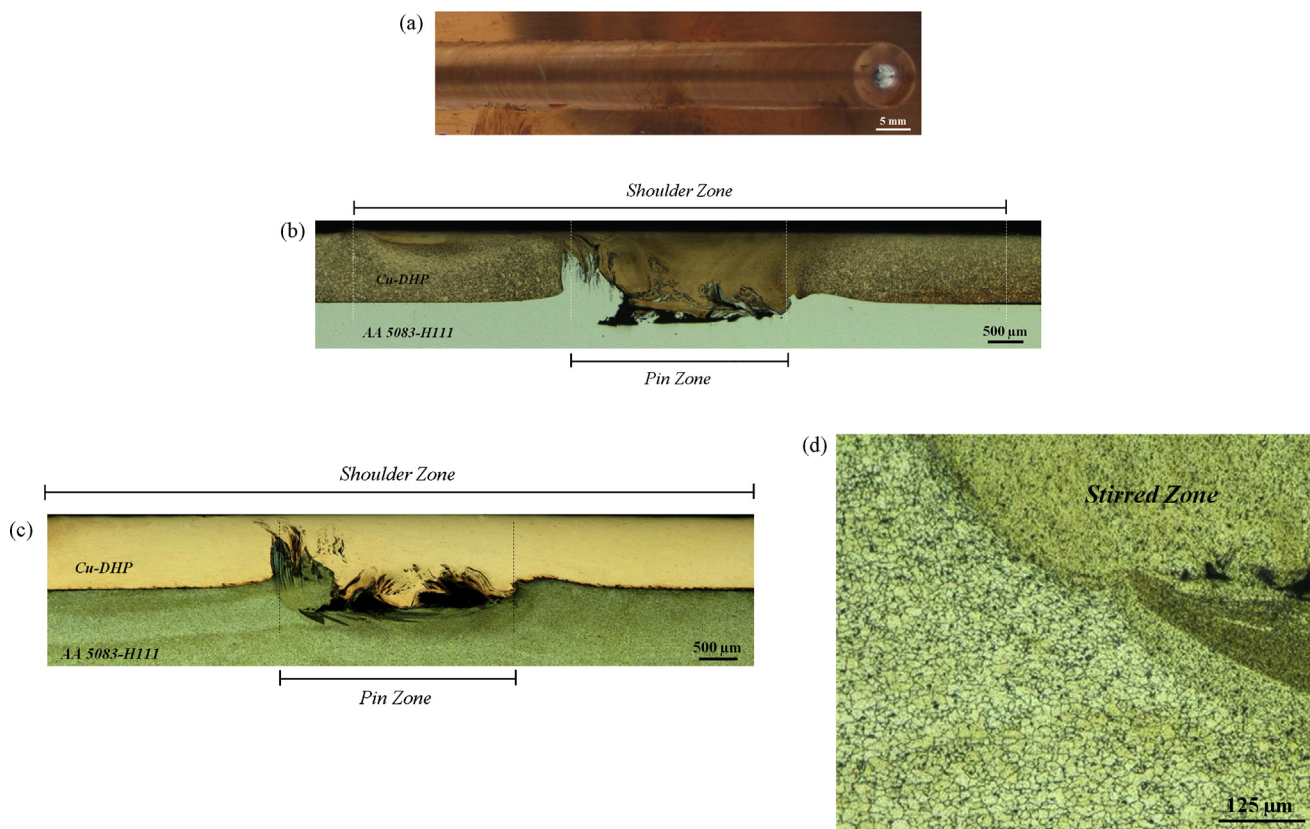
Surface photograph (a); copper (b) and aluminium (c) etched cross-section macrographs and micrograph of the aluminium stirred zone (d) of the W5 weld.
